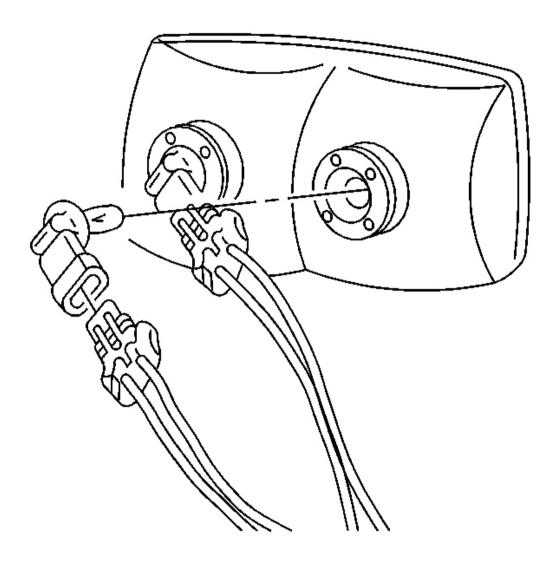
Electrical Connector To Headlamp Bulb/Socket Courtesy of GENERAL MOTORS CORP.
